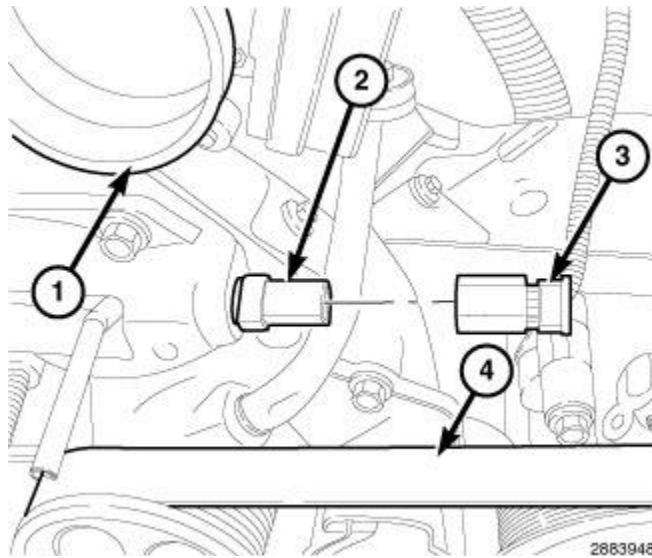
Electrical Connector, Sensor & Water Pump Housing
